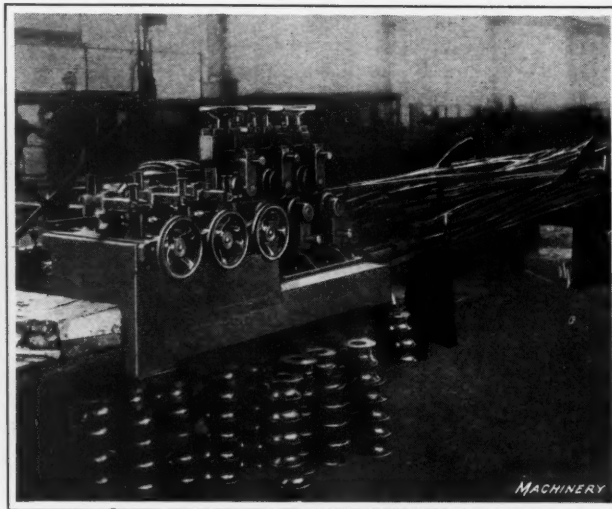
Close-up View of One of the Straightening Machines through which the Tubing is passed to remove Irregularities in Shape after it has been drawn
